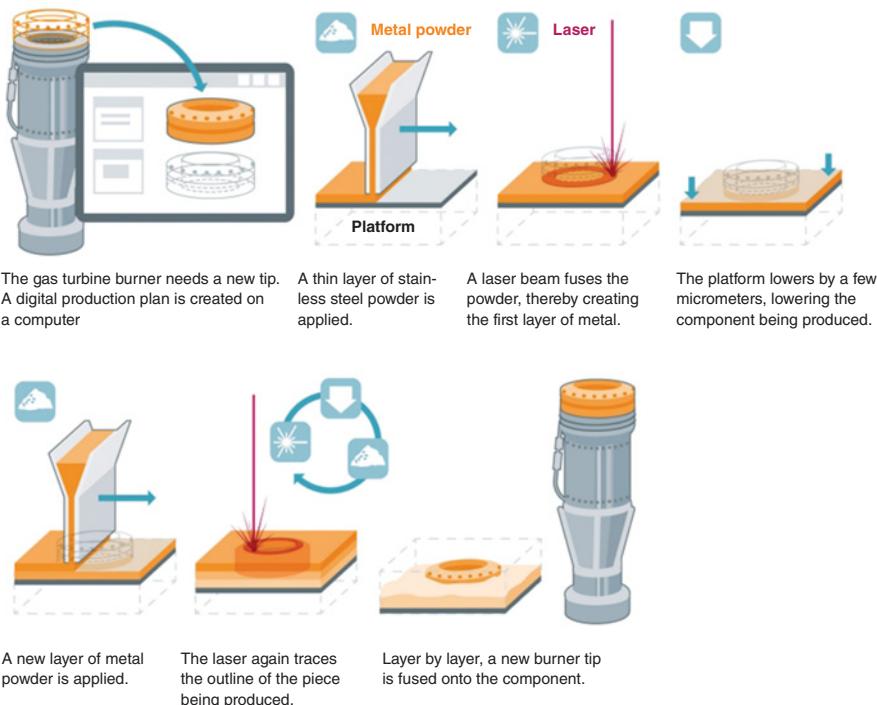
Complex mechanical parts are built by using a laser to melt patterns in a thin layer of powder, then adding more powder and repeating the process layer by layer. Color in electronic edition. (Courtesy of Siemens)
